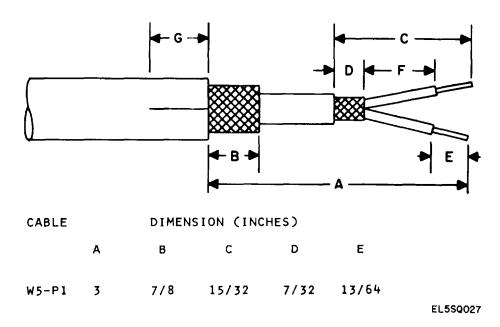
Stripping Details, Cable 1A1W5P1.
